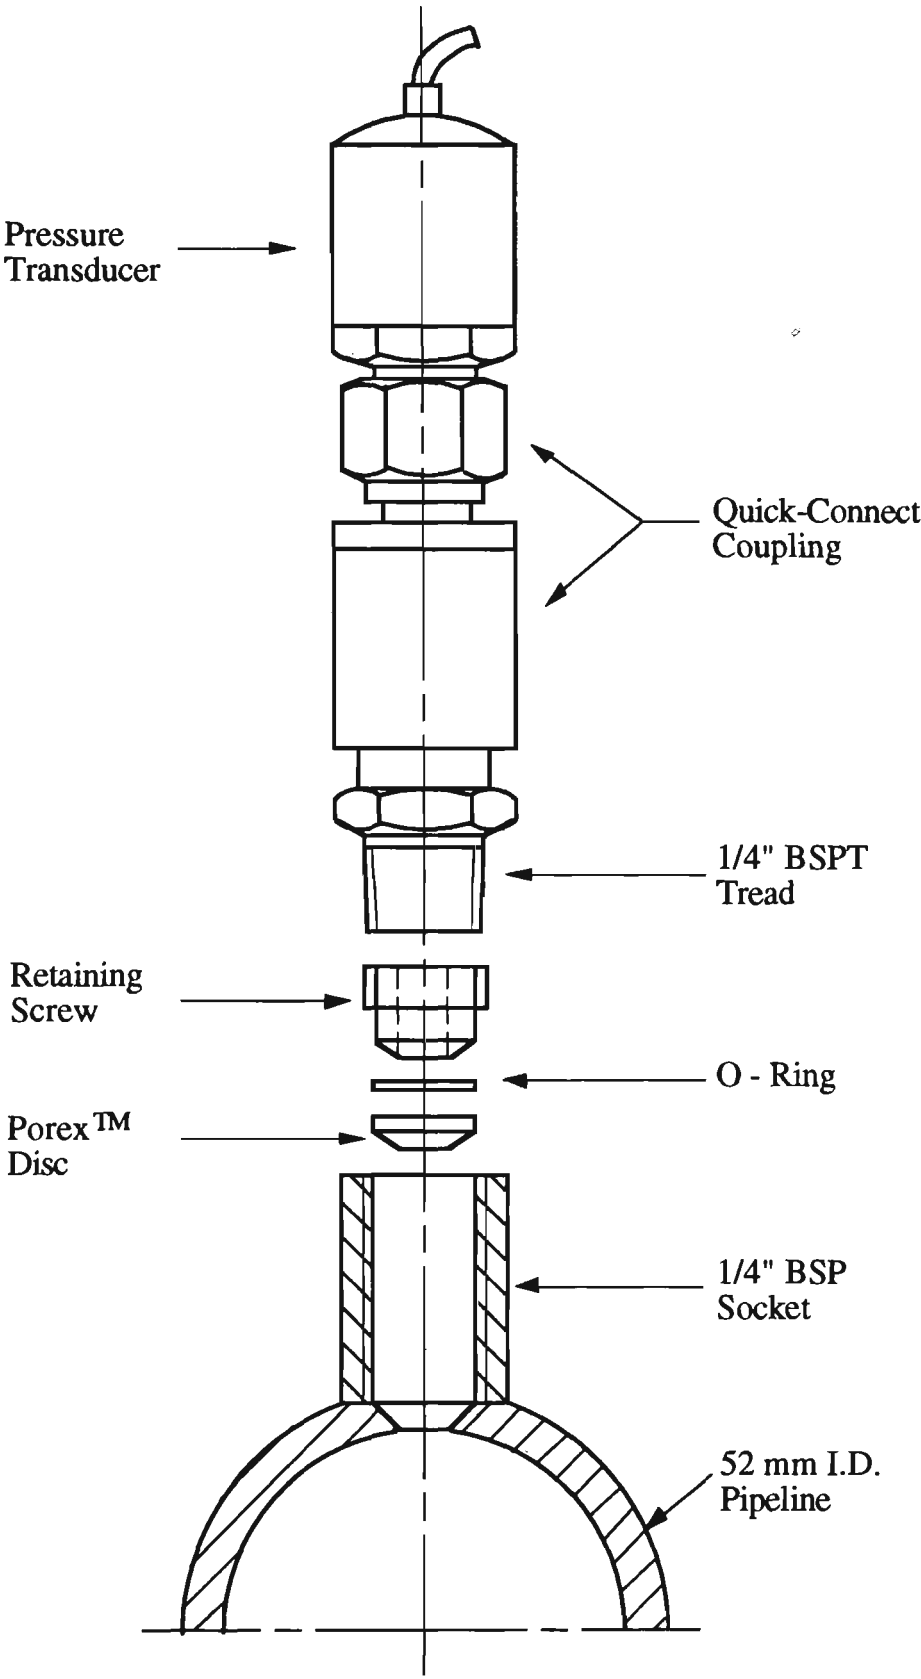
Exploded view of a typical pipeline air pressure tapping location.
